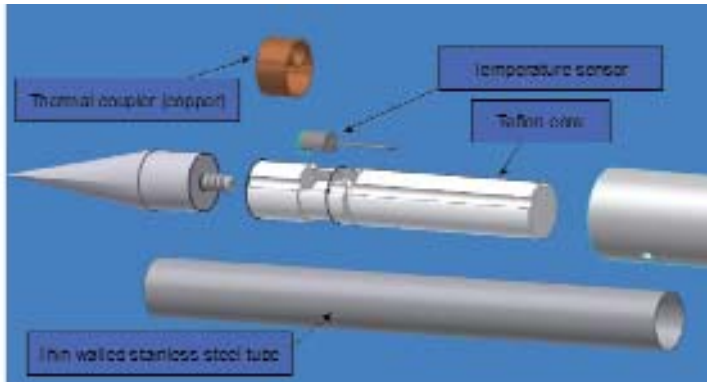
A mechanical sketch of the first gradiometer prototype.
